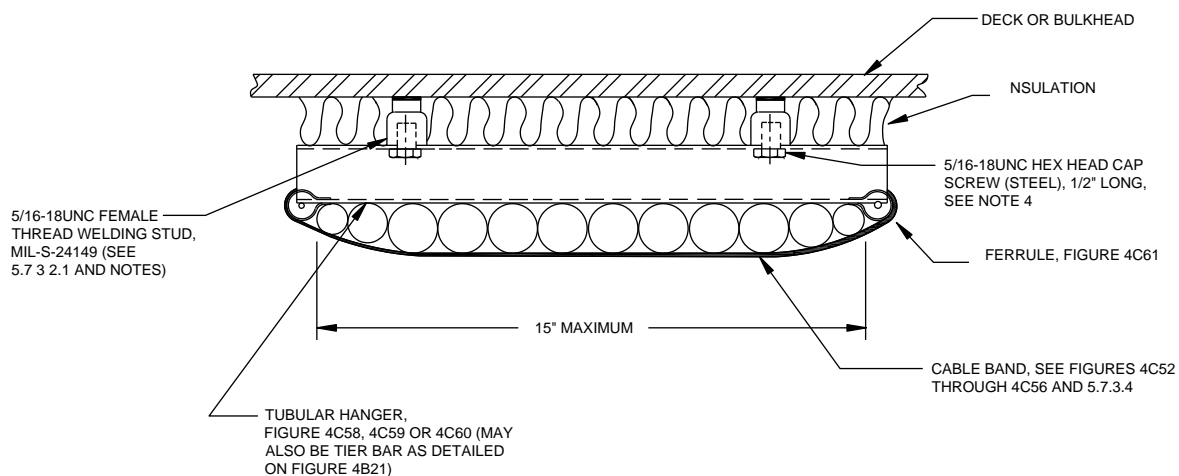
C10. Single cableway on steel structure secured with female welding stud.
